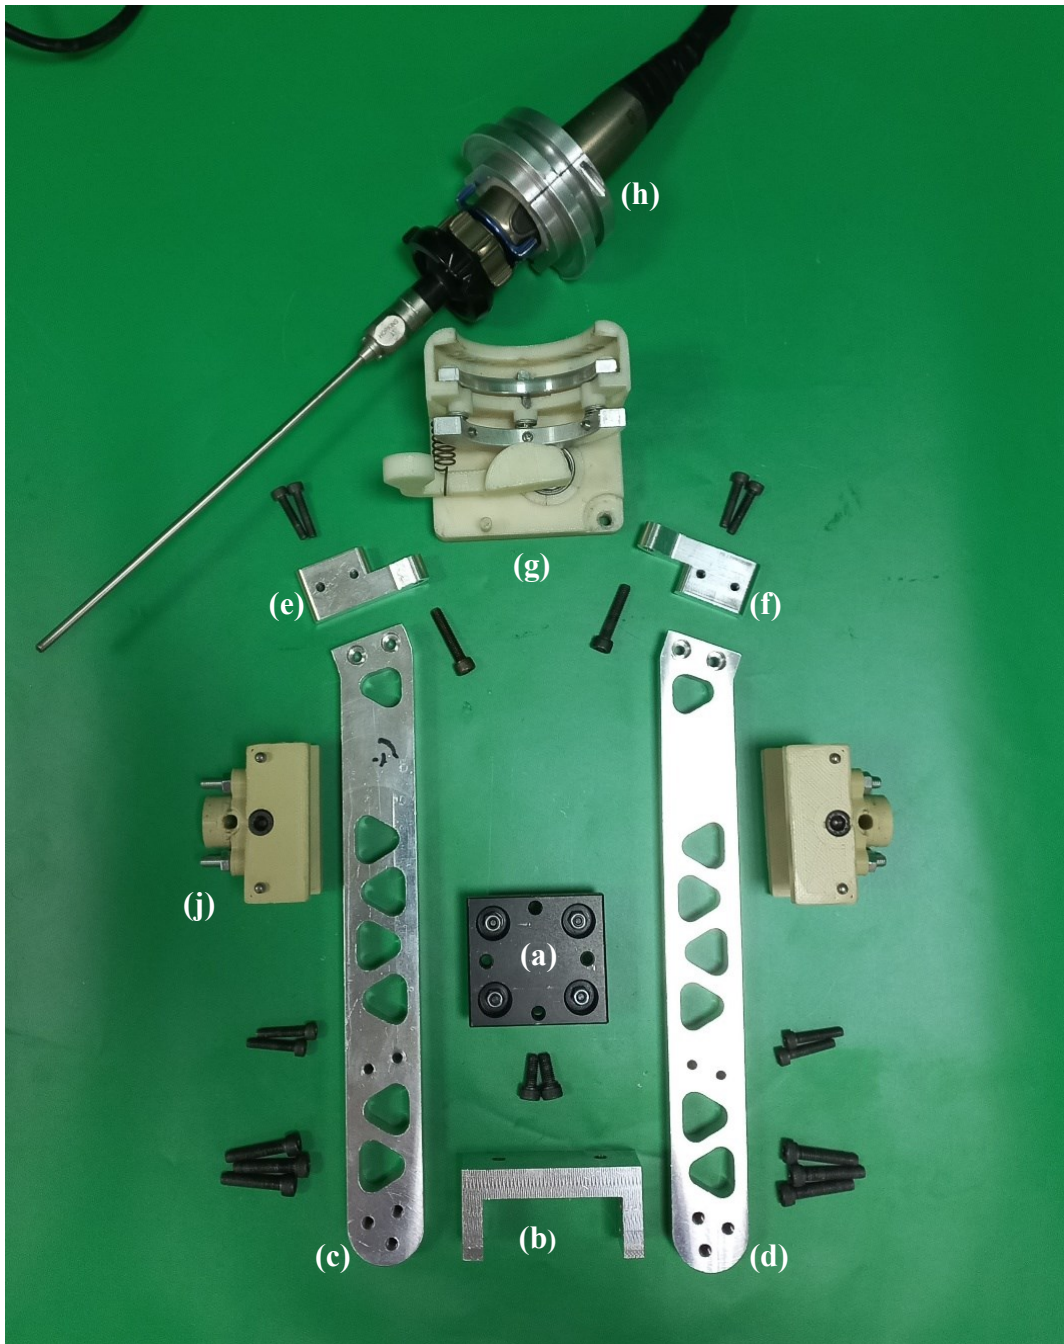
Linear carriage parts: linear carriage assembly parts (a) Linear carriage (D1-1), (b) Bridge connector (D1-2), (c) Left bridge(D1-4), (d) Right bridge (D1-3), (e) left Apparatus (D1-6), (f) Right apparattus (D1-5), (g) Endoscope locking mechanism (D3-1), (h) endoscope (D3-2), (j) Second CoM apparatus (D2-1, D2-2, D2-3)
